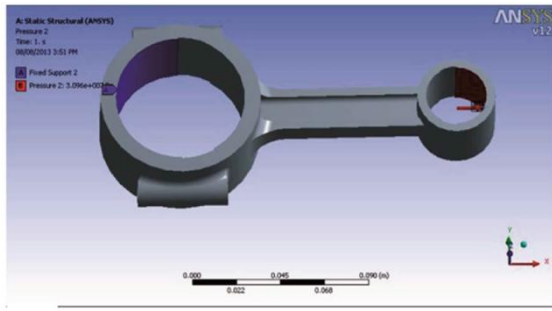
Tensile Load at Piston Pin End for Aluminum 7068 Alloy
